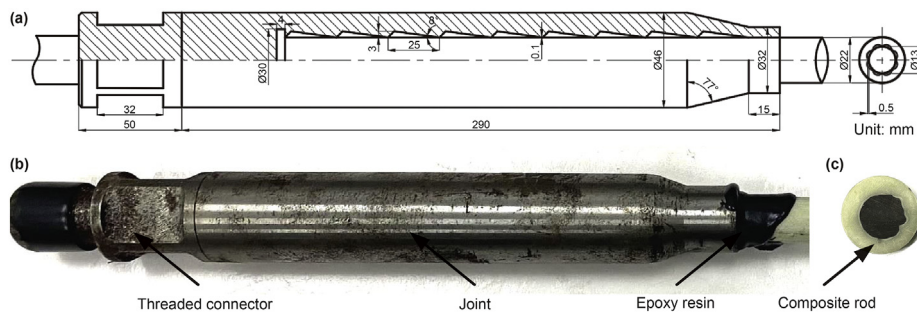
Structure and dimension of joint with (a) geometric dimension (b) product and (c) cross-section rod.
